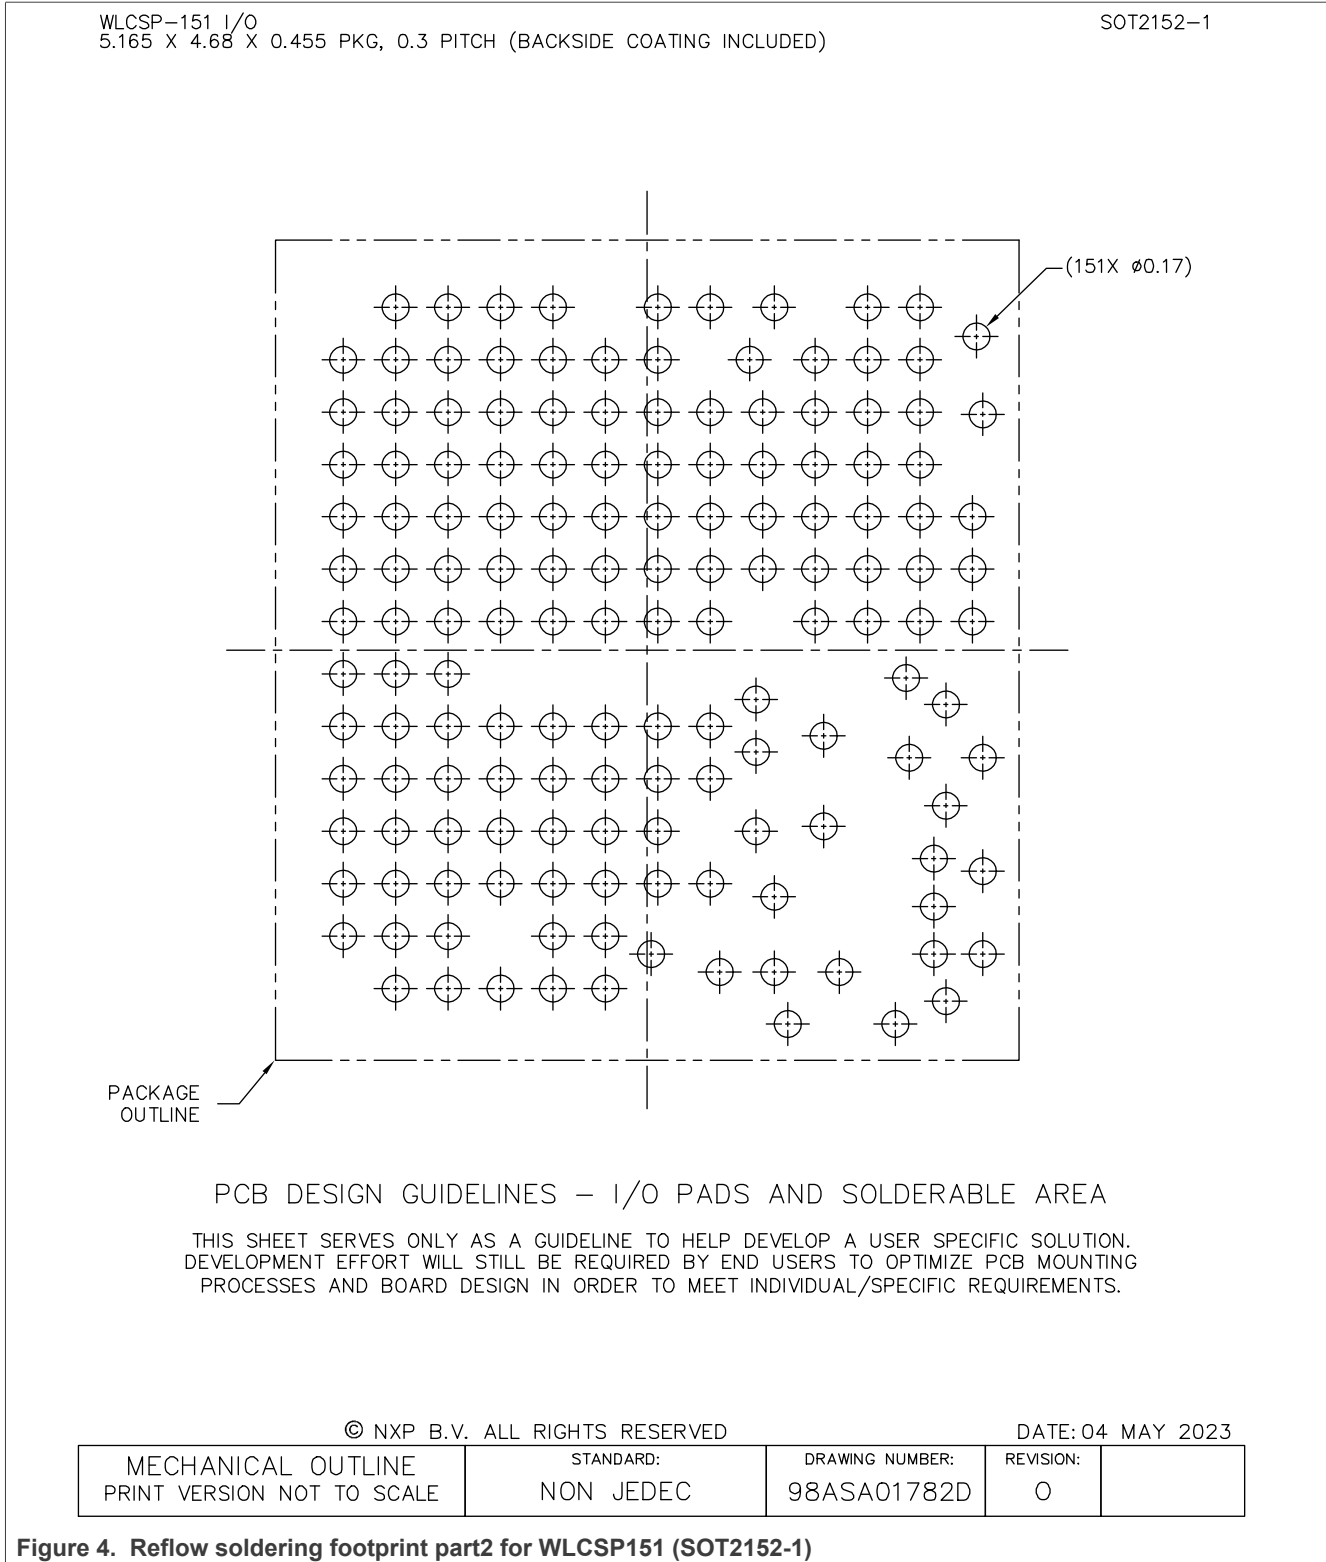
Reflow soldering footprint part2 for WLCSP151 (SOT2152-1)
